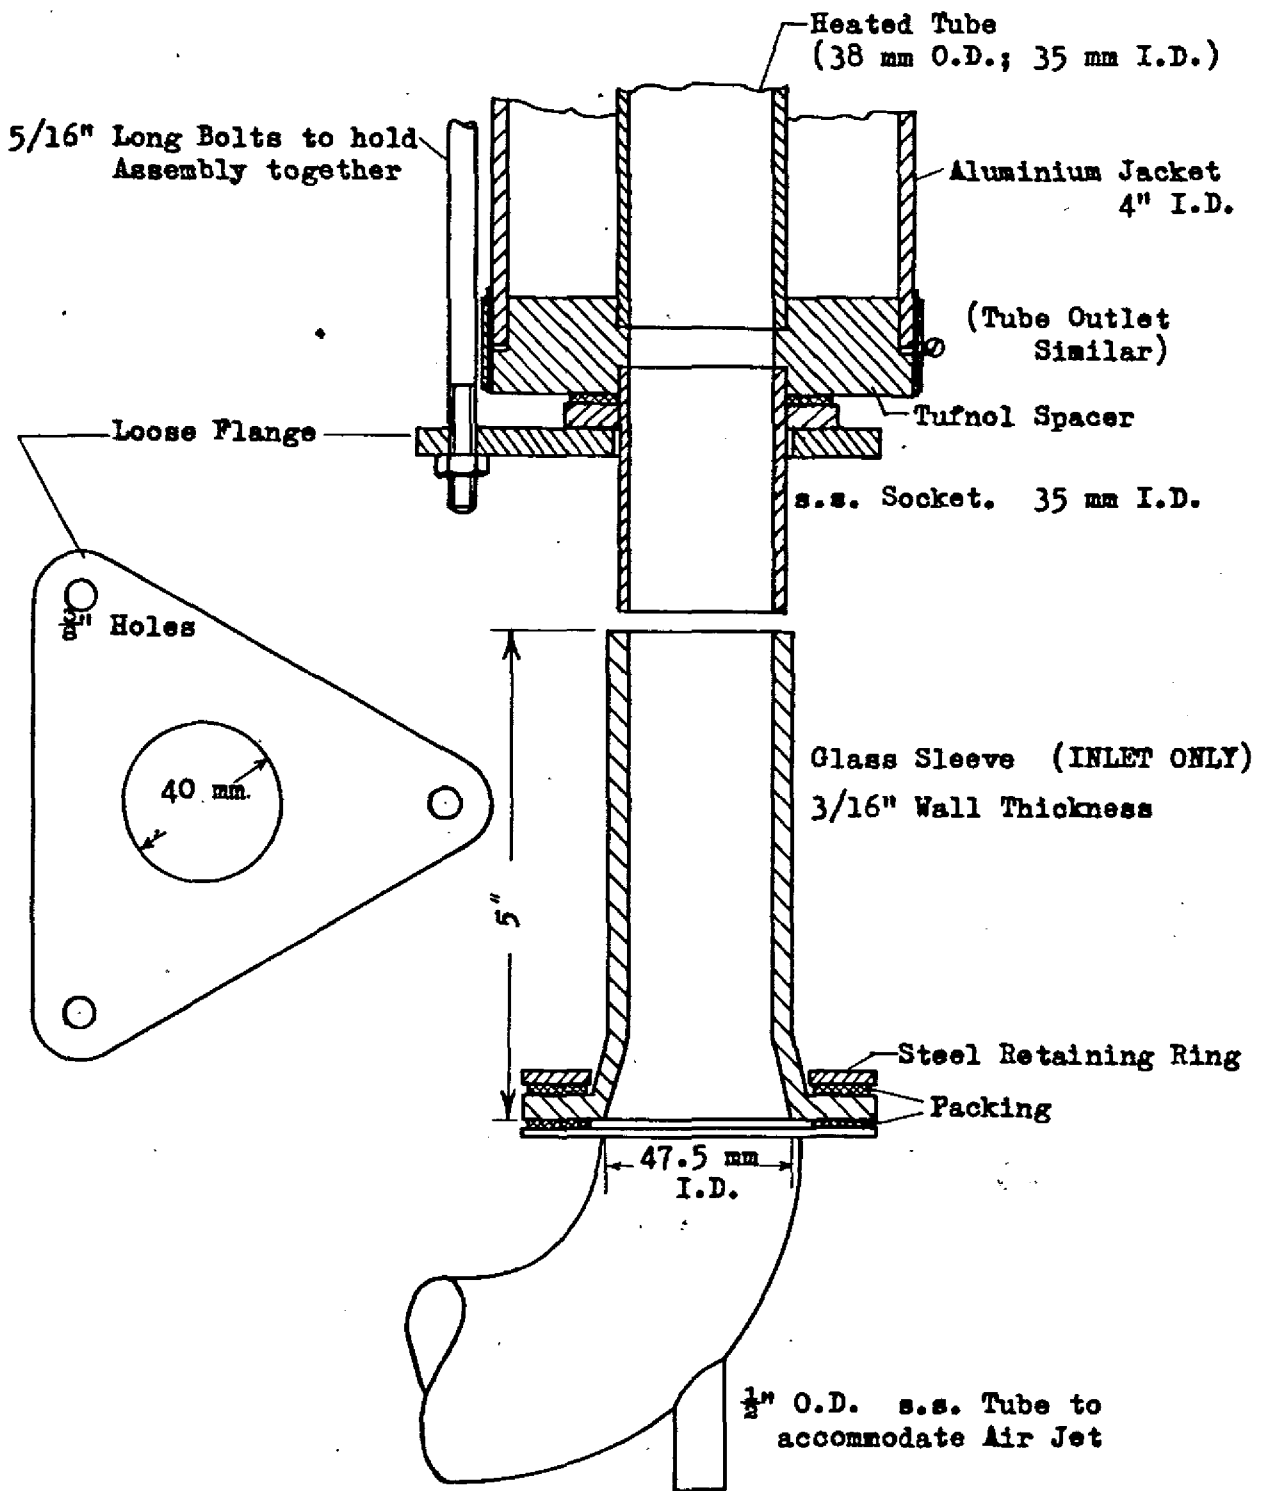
IMPROVED TUBE AND JACKET ASSEMBLY (INLET)
